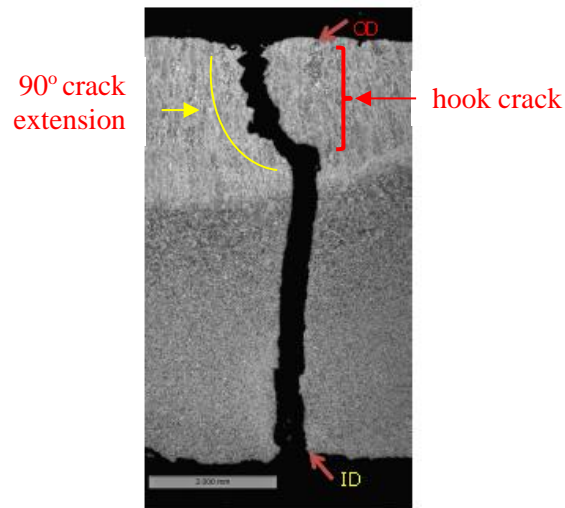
Cross Section of Hook Crack in Battelle Joint 16-36. Hook Crack Curvature Clearly Observed.
